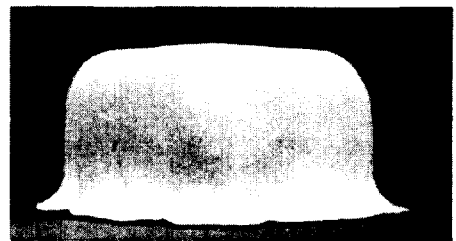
Failure in the part contact-ing with the die radius in deep drawing test
